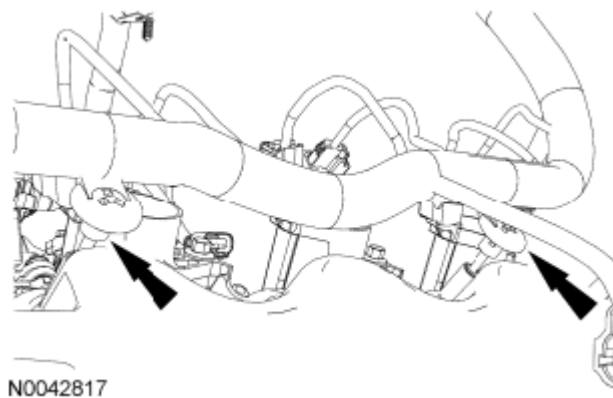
Locating Wiring Harness Retainers And LH Valve Cover Studs
